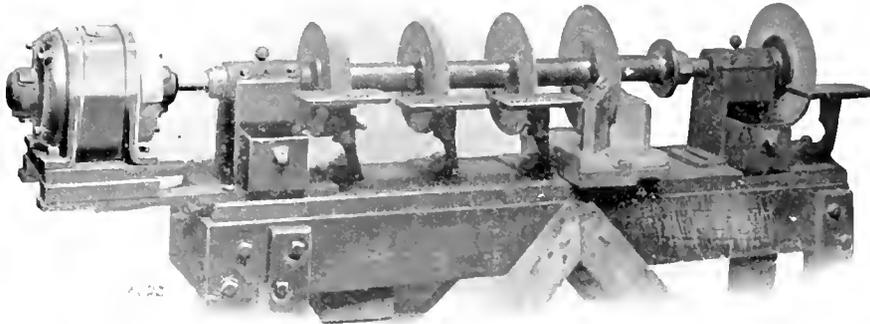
1 H.P. Induction Motor Driving Six-Wheel Grinding Set
